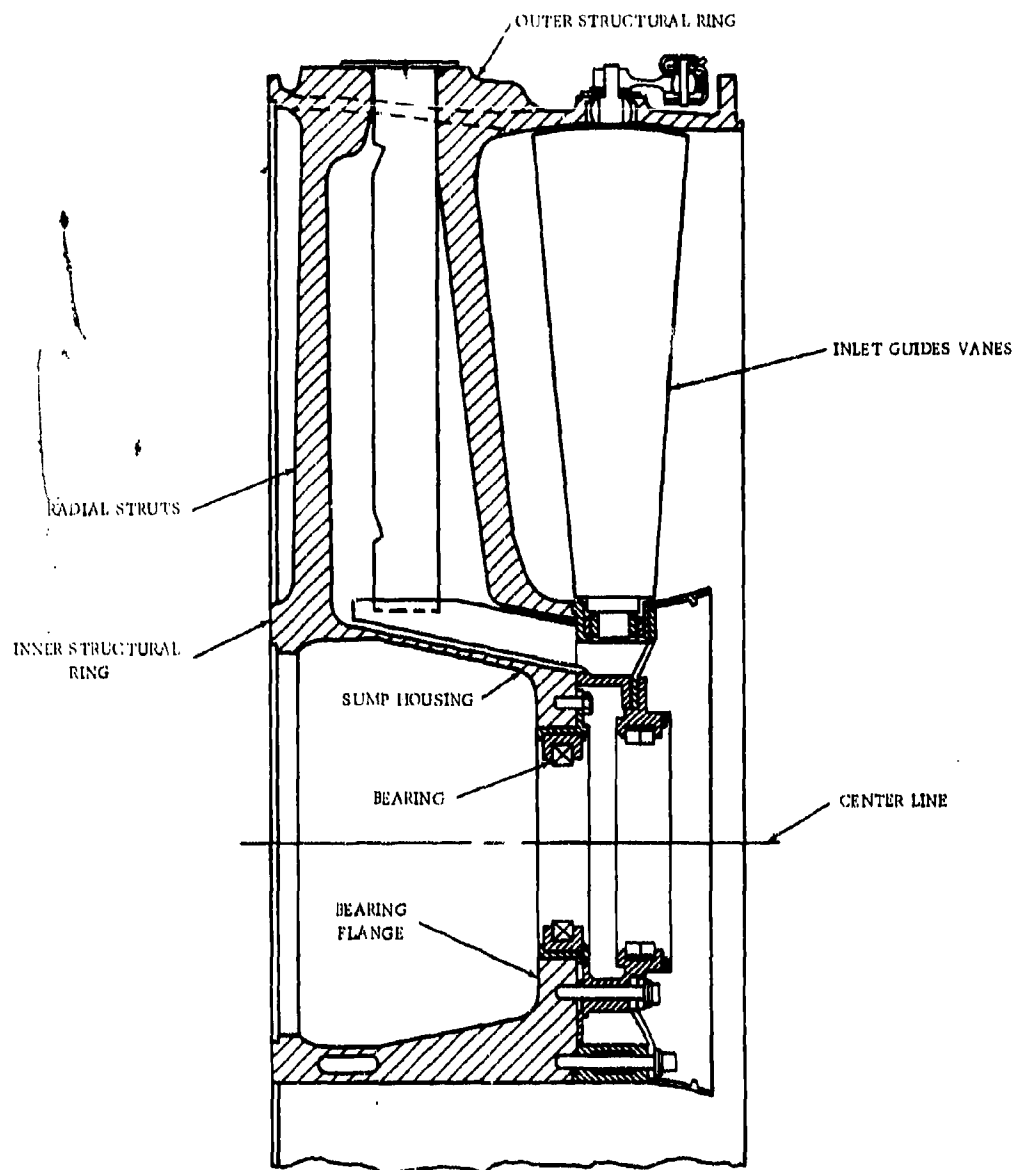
CJ805 COMPRESSOR FRONT FRAME
